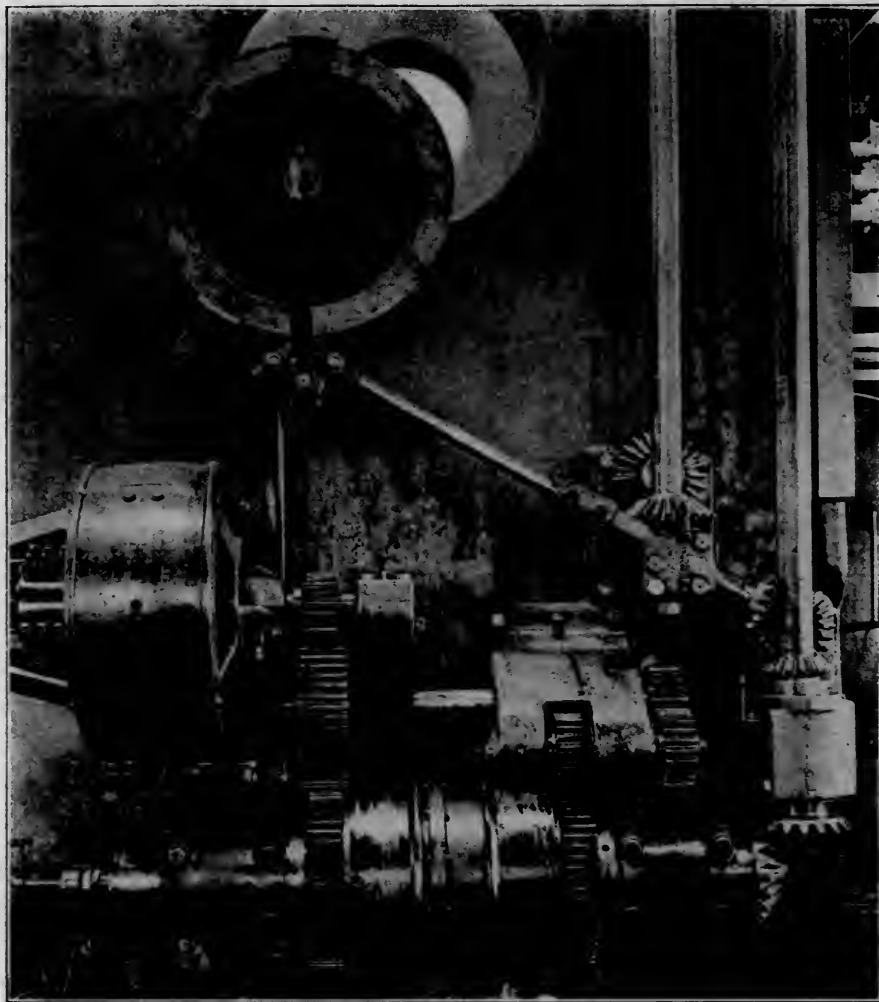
DRIVE FOR THE SLOTTOR ATTACHMENTS.
